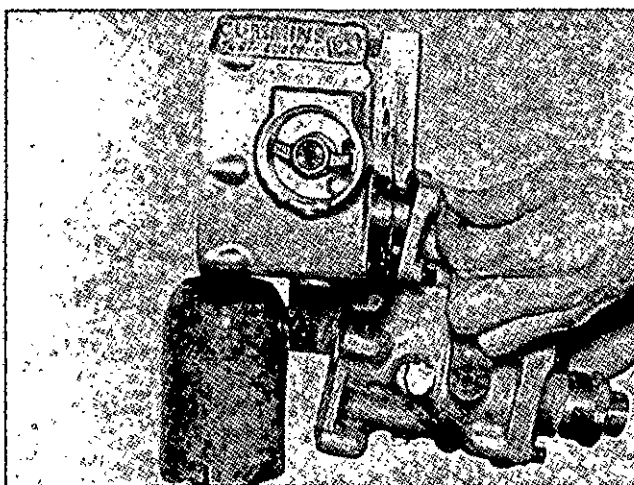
, (F552). Assemble the governor housing to the pump.
